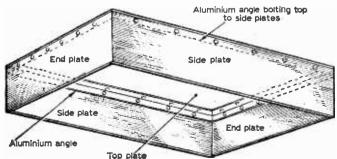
An underside view of a chassis assembled from flat aluminium plates bolted to aluminium angle. This form of chassis construction involves no bending of metal at all.
